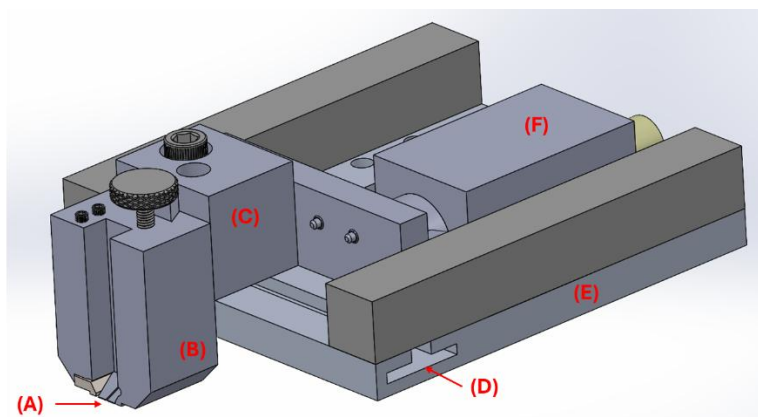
Drive Plate - Blade (A), Blade Holder (B), Tool Post (C), T-Slot (D), Drive Plate (E), Drive Block (F)
